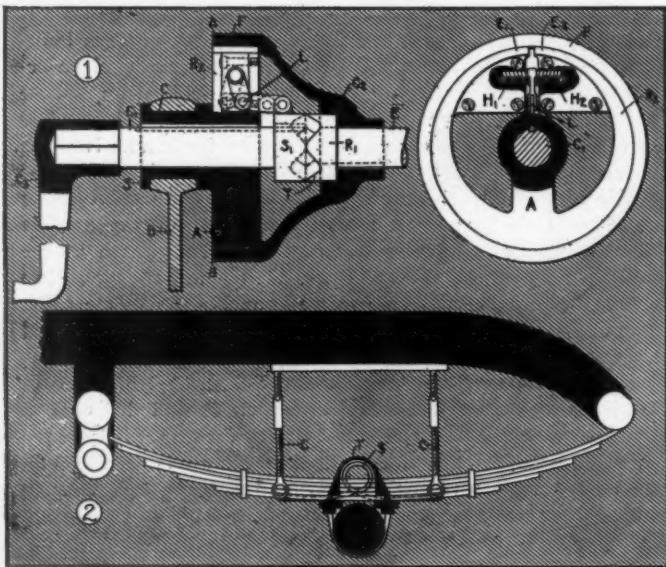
Engel safety crank. Fig. 2—Woodring shock absorber
